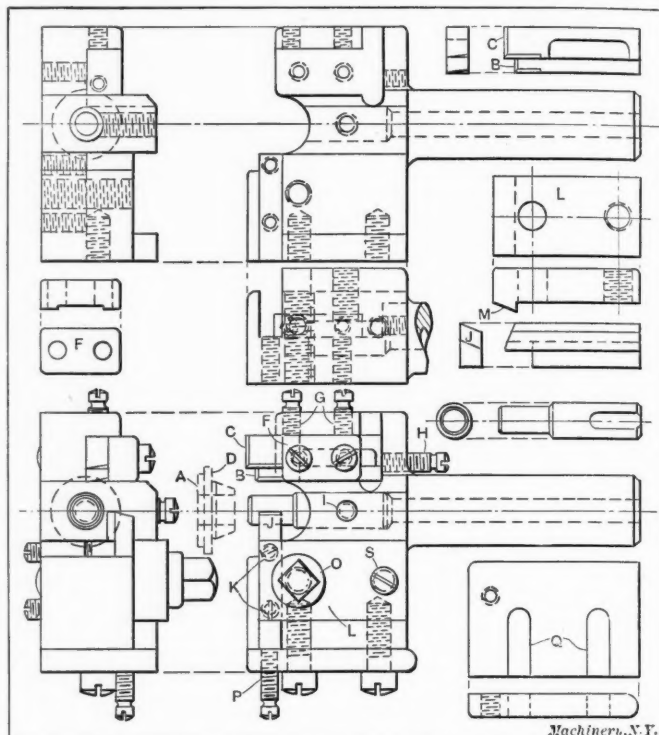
Box-tool for Finishing Another Type of Ball Bearing Cone
